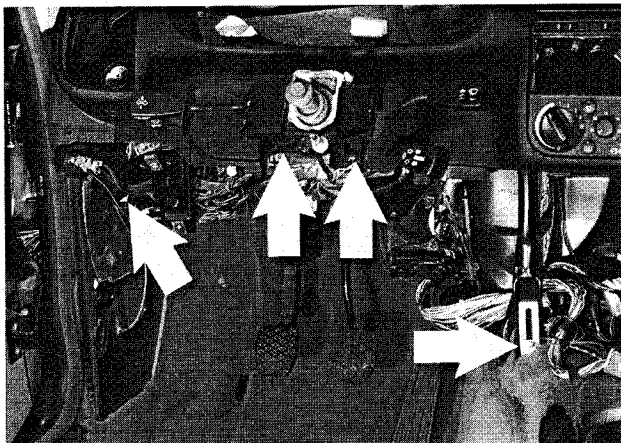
Reinforcement bar bolts (arrows). Shear (headless) bolts at steering column will have to be drilled out and replaced during reinstallation.
